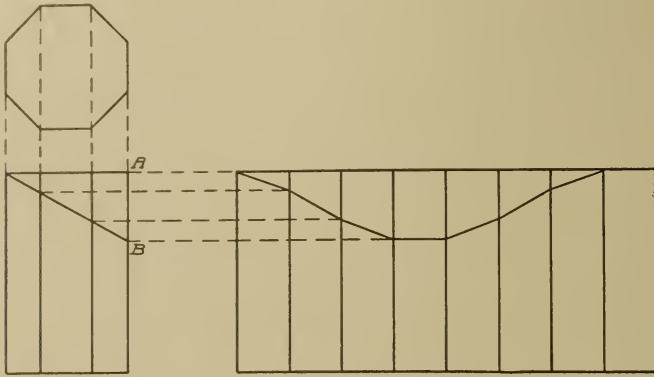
Plan, Elevation, and Development of an Octagonal Prism
